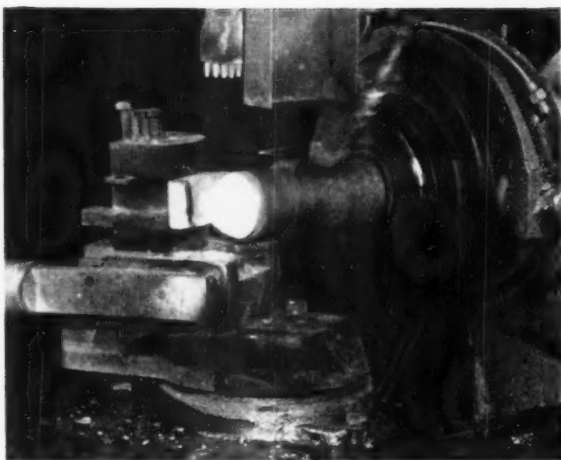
When the work has reached forming heat, the flames are withdrawn and the shaping tool is forced against the work. Tube end is shown three - fourths closed.
